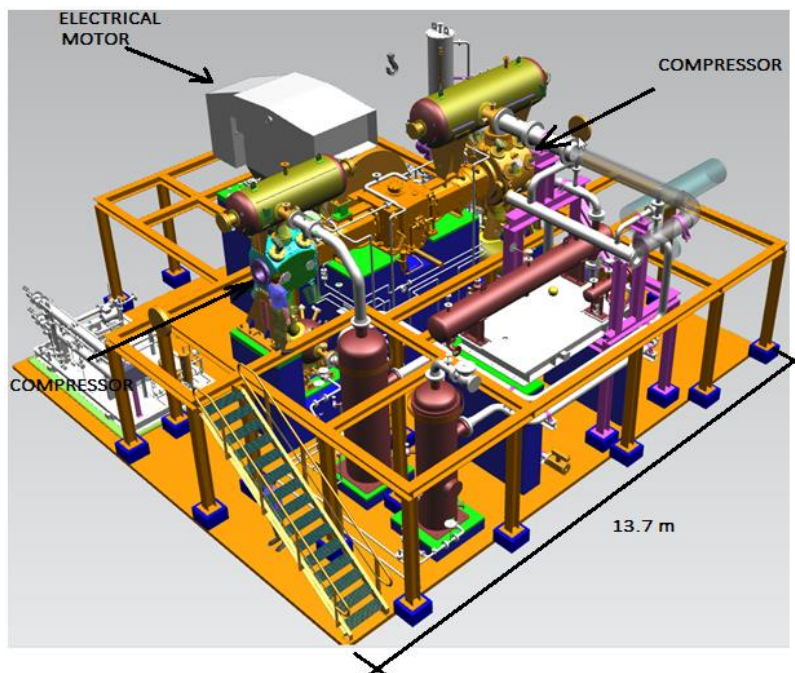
Layout arrangement – Reciprocating machine, Compressor – 3D View
